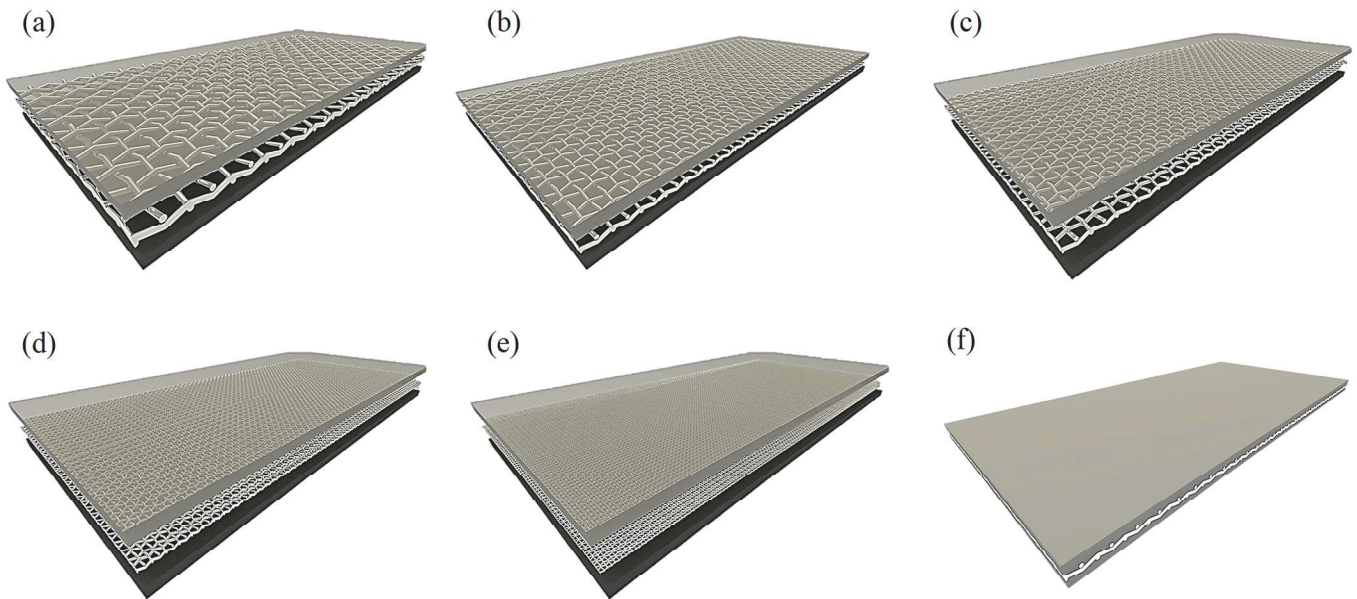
Exploded-view drawings of CF/PEEK/BwM sets showing the assembly and dimensioning perspective of a $150 \times 100\text{mm}$ sample: (a) CF/PEEK/BwM M14, (b) CF/PEEK/BwM M30, (c) CF/PEEK/BwM M40, (d) CF/PEEK/BwM M60, (e) CF/PEEK/BwM M80, and (f) representation of the hybrid steel-composite after thermal consolidation.
